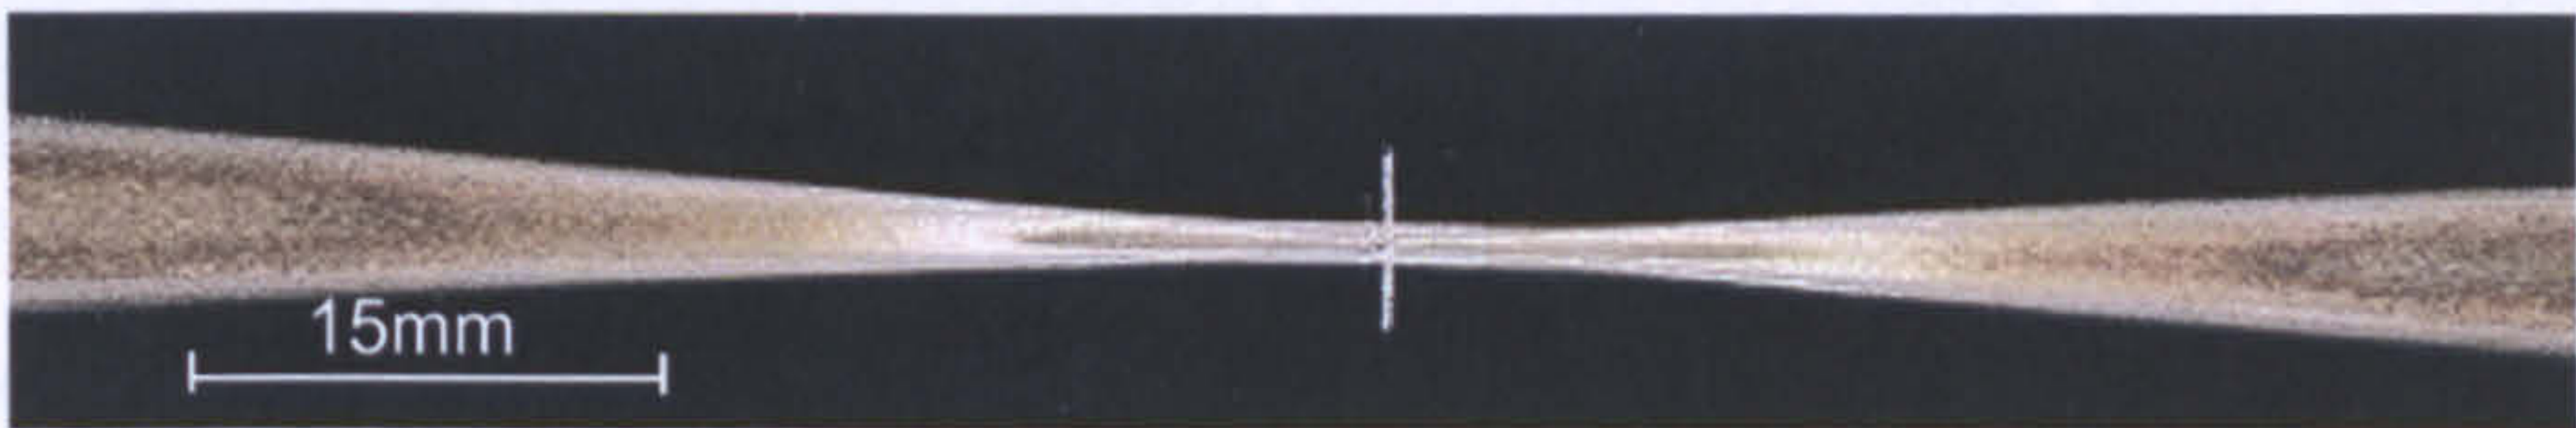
A double-sided CO₂ laser weld in 25mm thickness C-Mn steel produced through an 11-pass manual metal arc welded joint, demonstrating the high aspect ratio of a laser weld compared with conventional arc welding (51)
